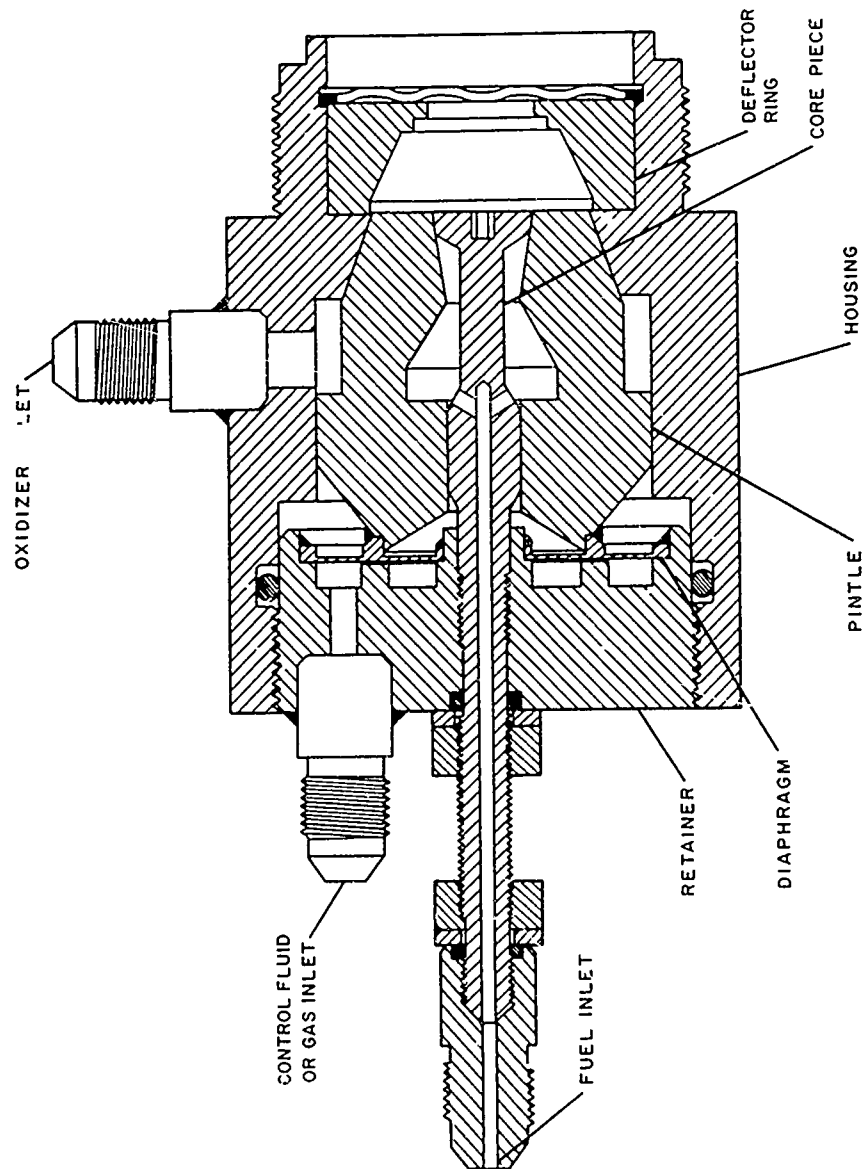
Packrat II Gas Generator Variable-Area-Injector Assembly.
